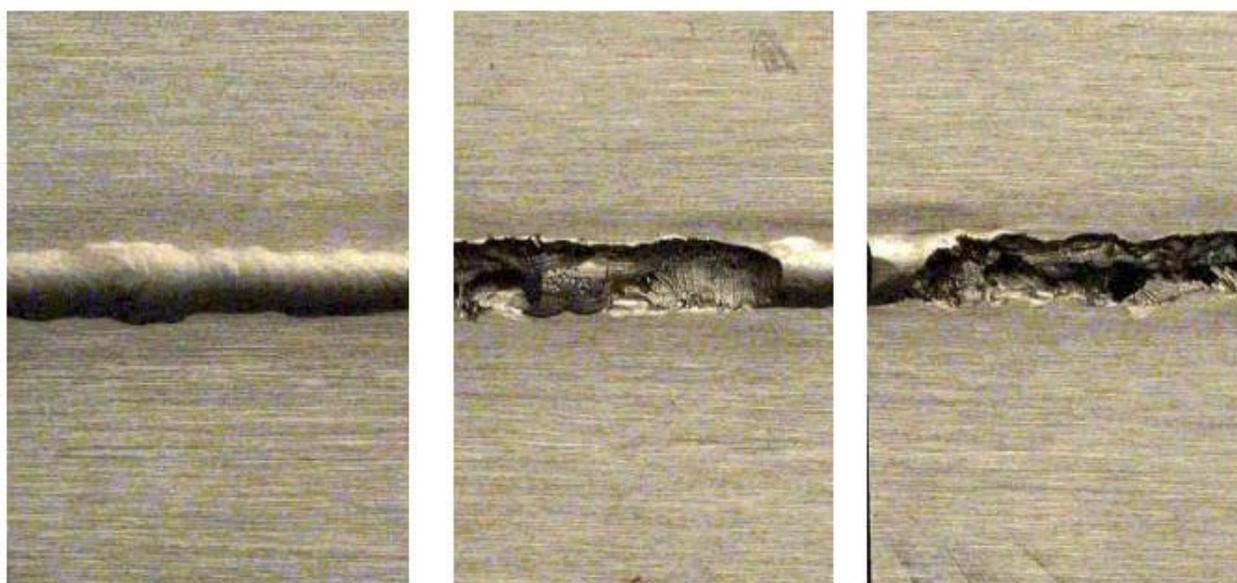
INCONEL 622 welded with INCONEL 622 filler metal (pitting resistance of various base metal and weld metal combinations).
